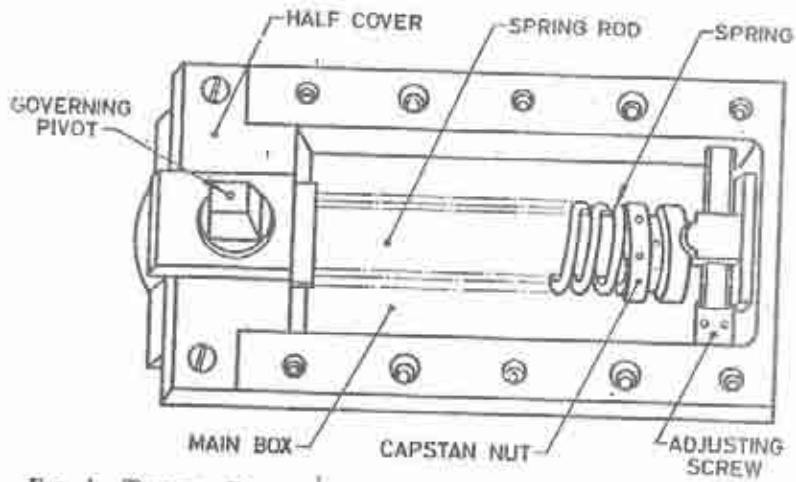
TYPICAL DETAILS OF A DOUBLE ACTION FLOOR SPRING (WITHOUT OIL CHECK)
